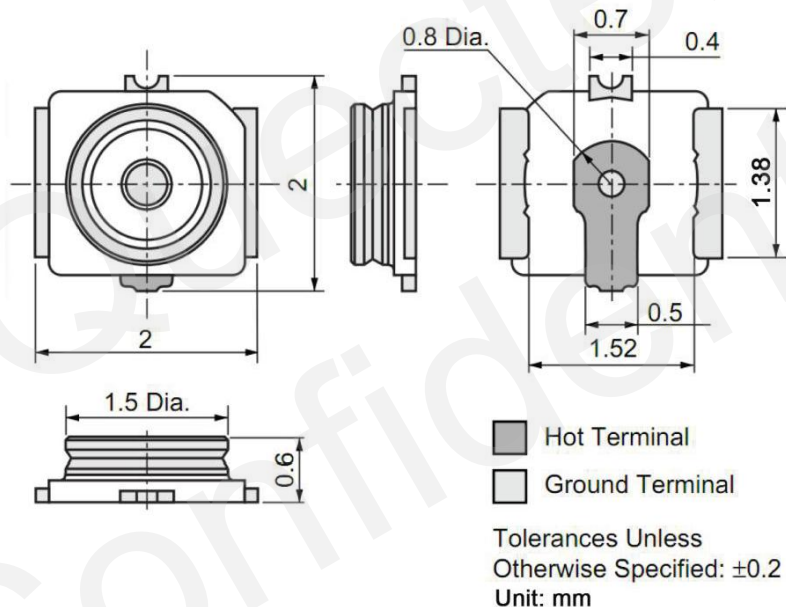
Dimensions of the MM4829-2702 Connector (Unit: mm)
